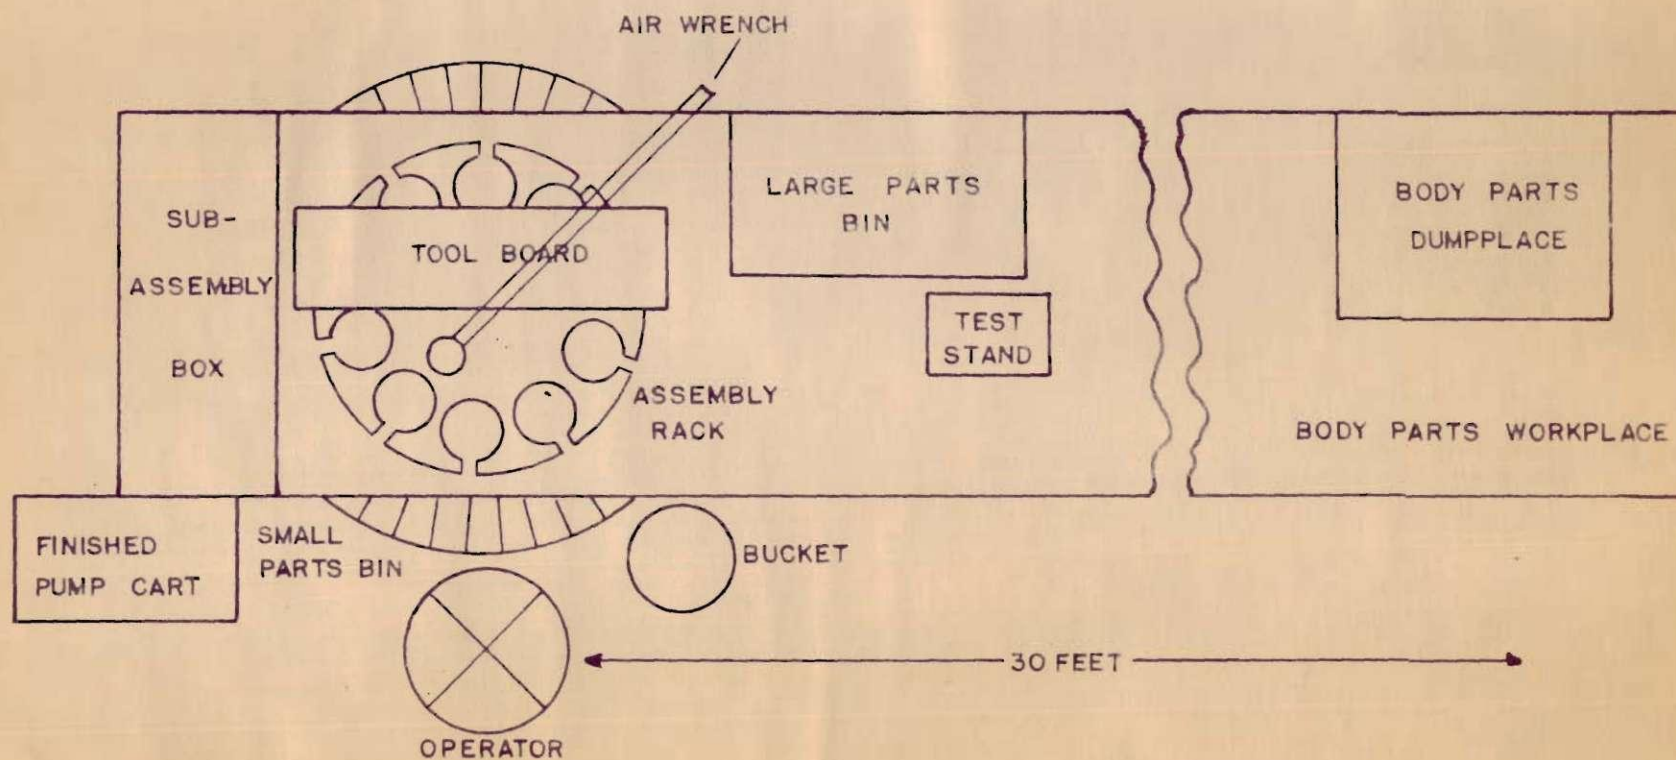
WORKPLACE LAYOUT FOR ASSEMBLY OPERATION
